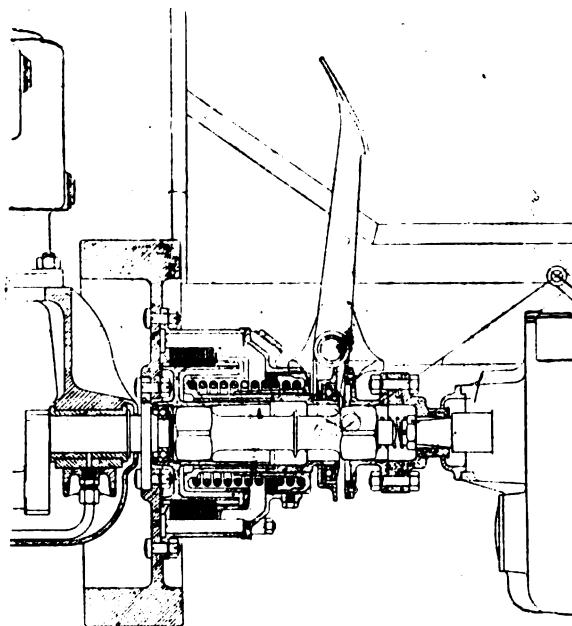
Sectional View of Clutch of Unic 24-30 h.p. Car.
